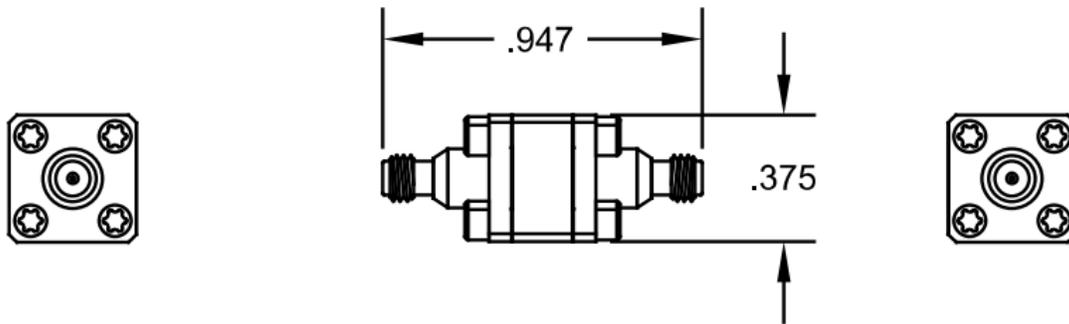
HL8828 Mechanical Drawing (dimensions in inches)
